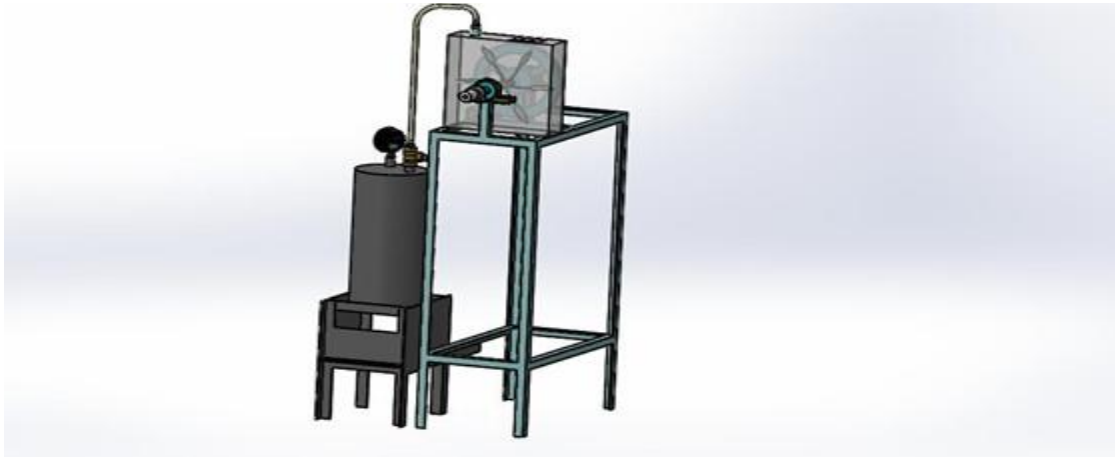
Isometric view of the assembled waste-to-energy system model.
